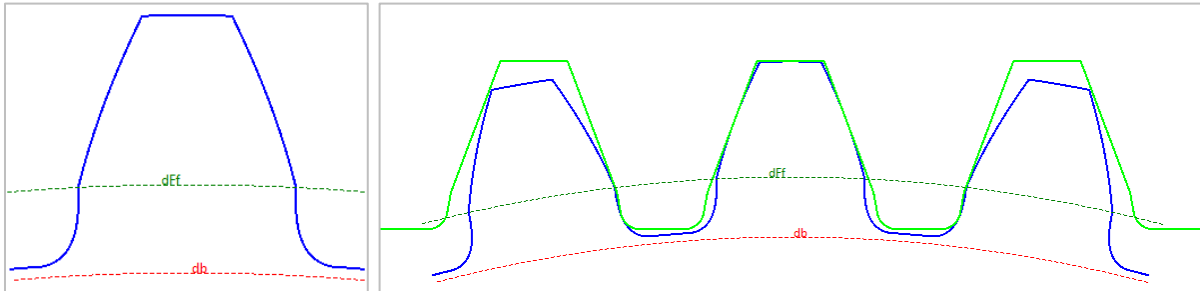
Tooth form after finish machining. Right: Hypothetical tool in green.
